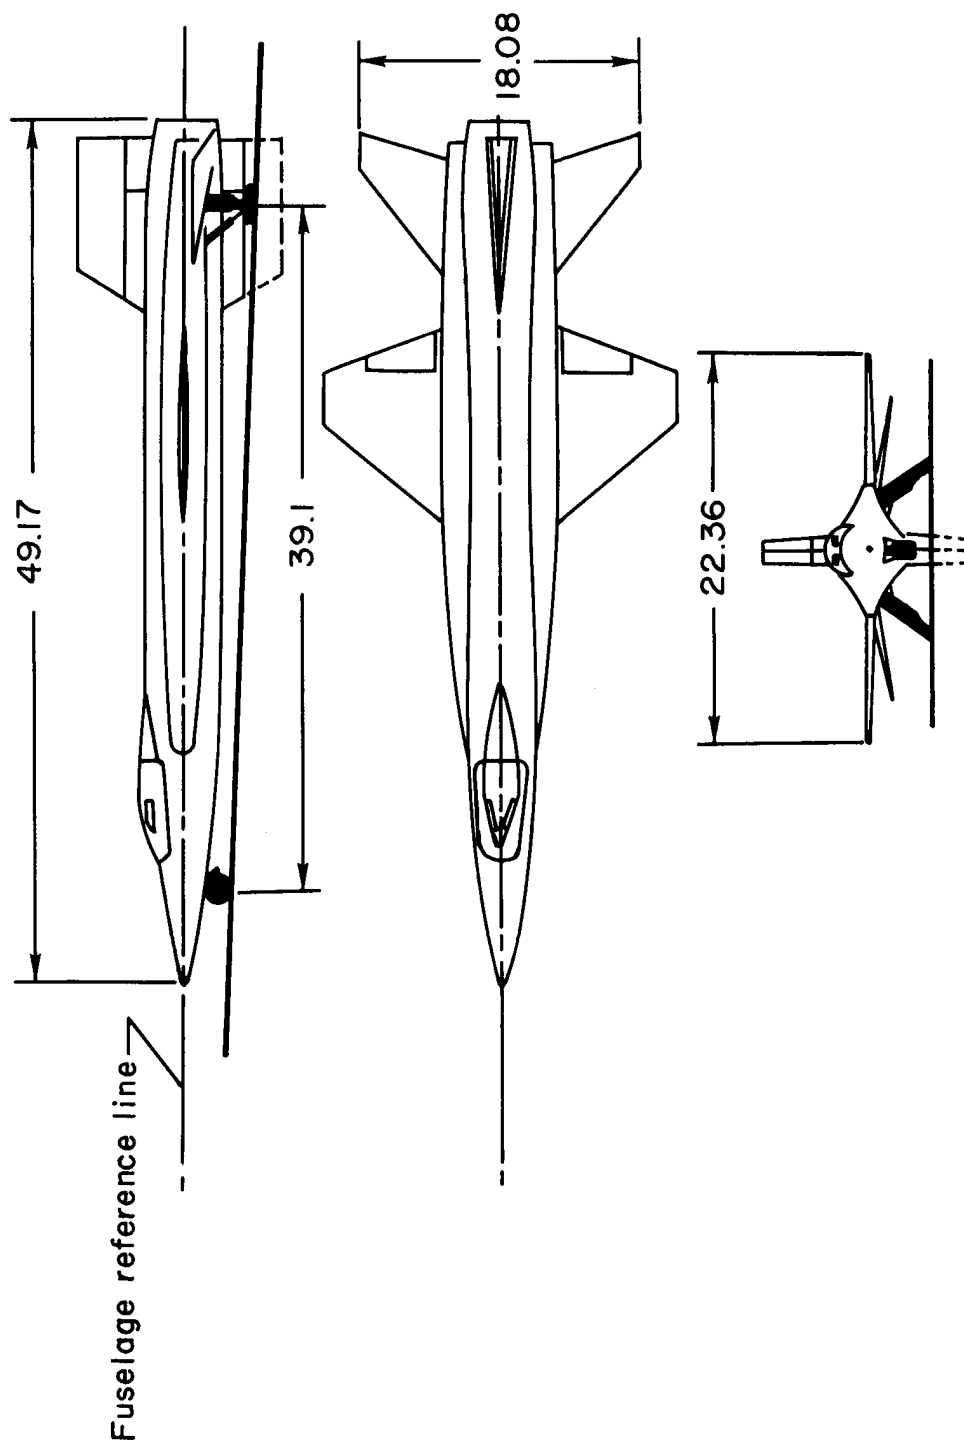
Three-view drawing of the X-15 airplane. All dimensions in feet.
